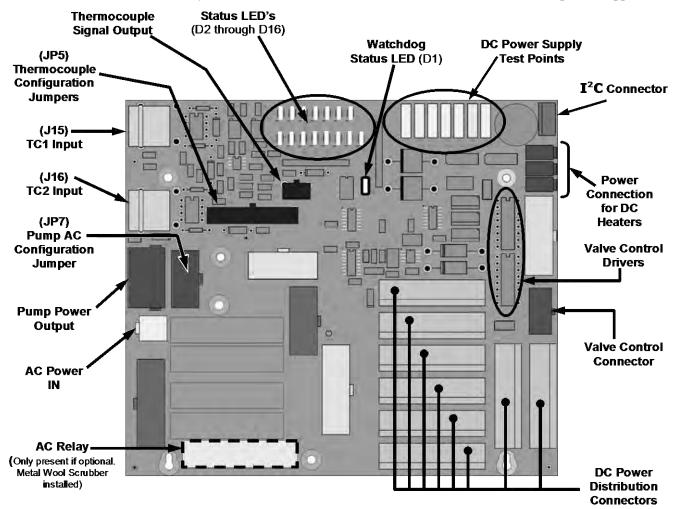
Relay PCA Layout (P/N 04523-0100)
